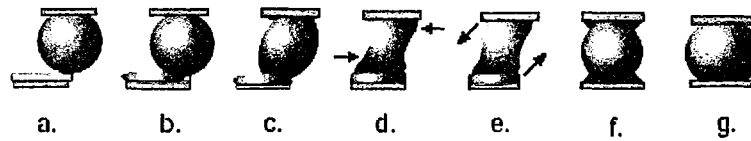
Solder Joint Self Alignment at Reflow Soldering
